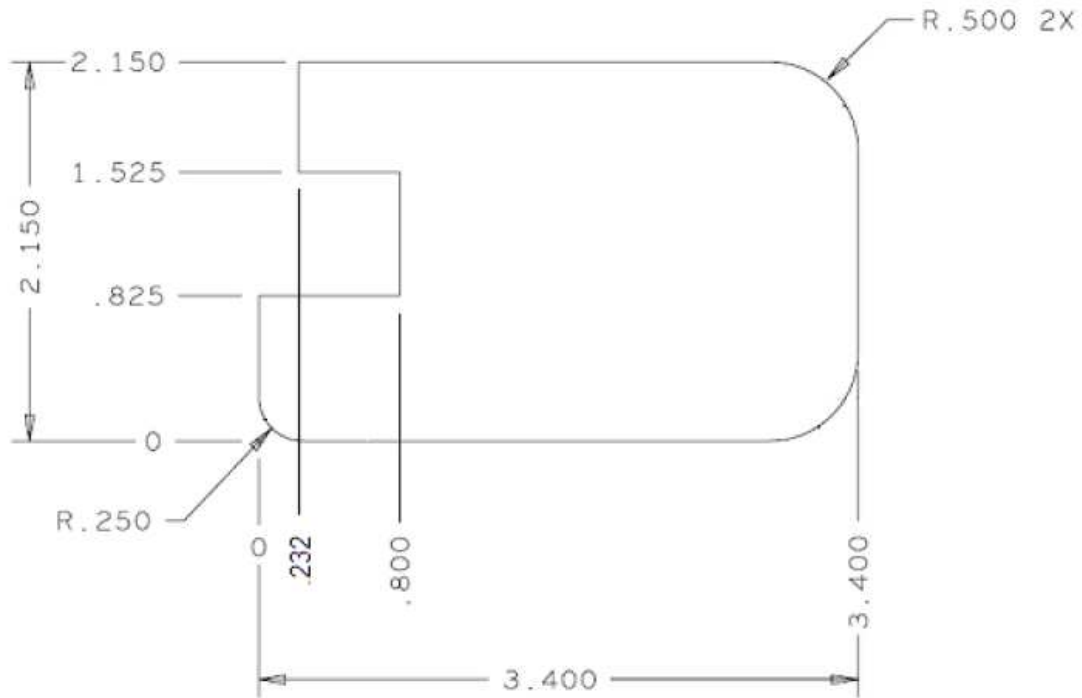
BeagleBone Audio Cape Dimensions Drawing
